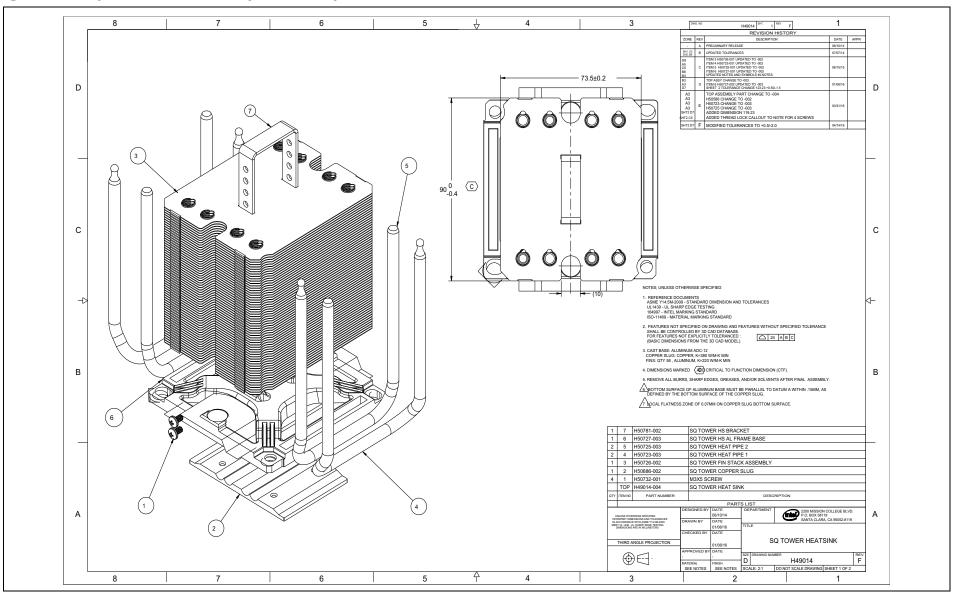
Square Tower Heatsink (Sheet 2 of 2)
